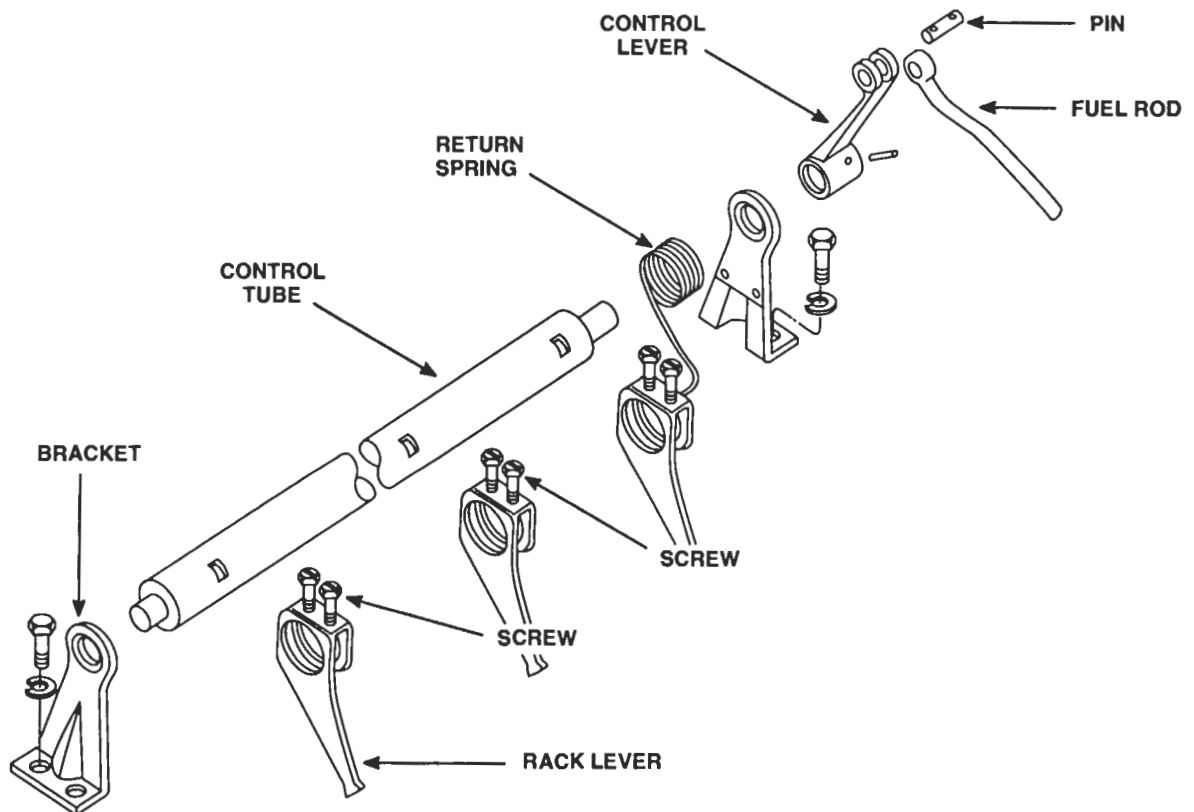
Injector Control Tube Assembly (Non-Spring Loaded)
